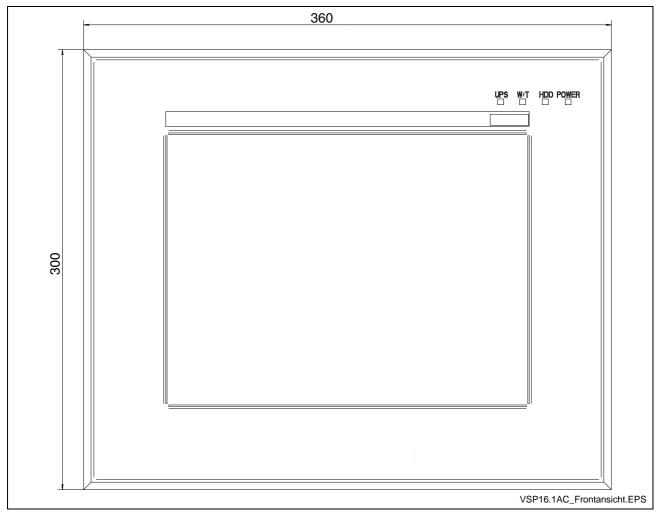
Dimensions, front panel of the VDP 16.2AK
